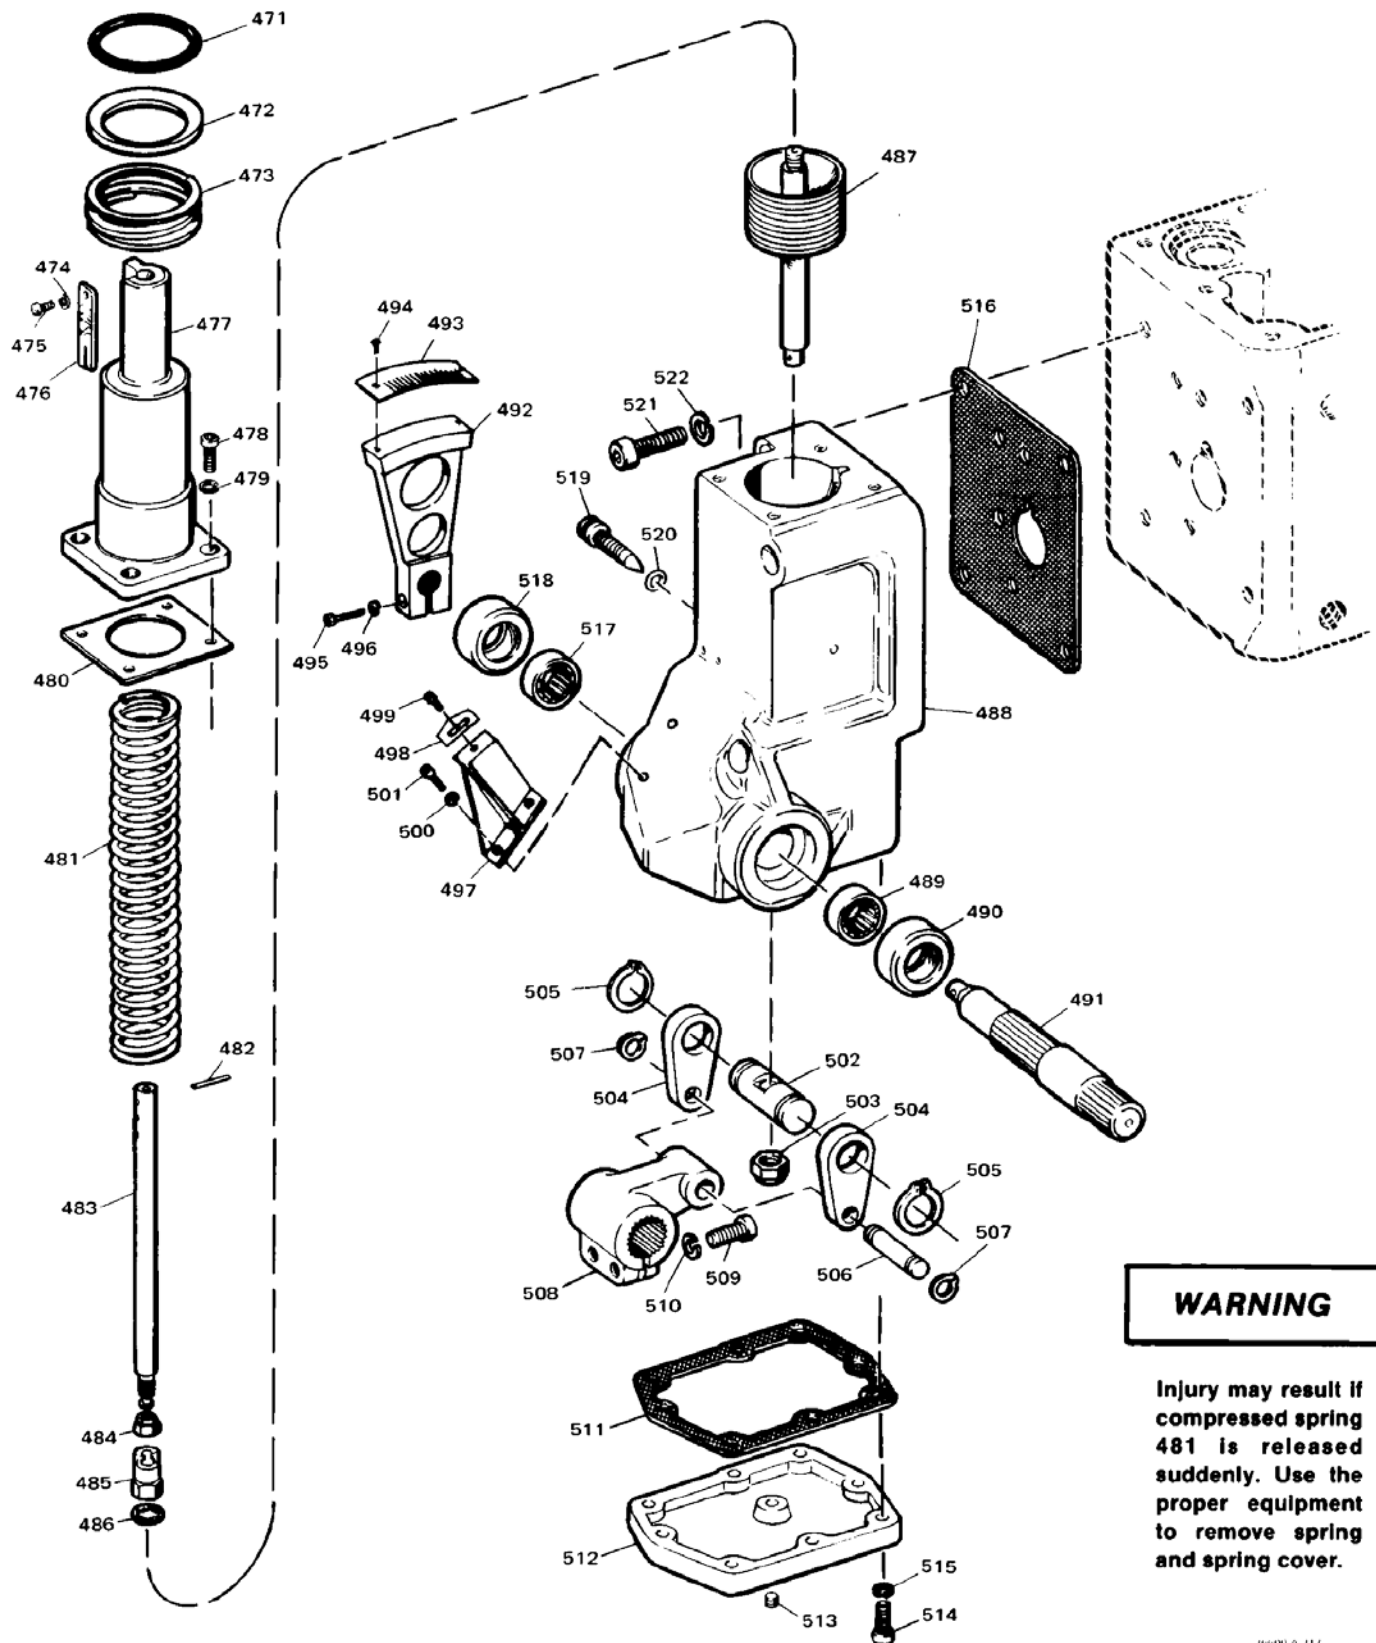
Exploded View of 12 ft-lb Spring Loaded Power Cylinder (Linear Output)
